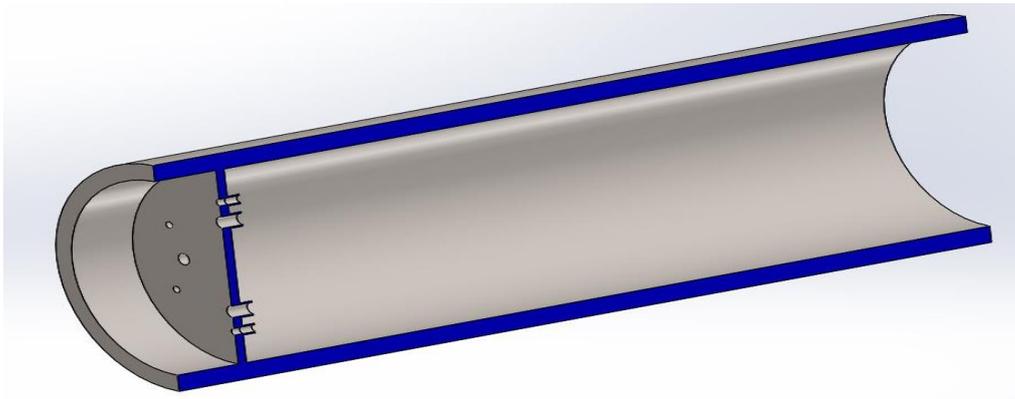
3-Dimensional Sectioned View of the Combustion Chamber
